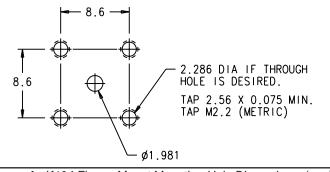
K104 Flange Mount Mounting-Hole Dimensions (mm)
